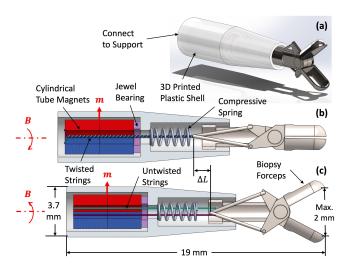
(a) The assembled magnetically actuated TSA gripper design. The cross-sectional view of the design is presented with (b) forceps closed when the strings are twisted and (c) forceps opened when the strings are untwisted.
